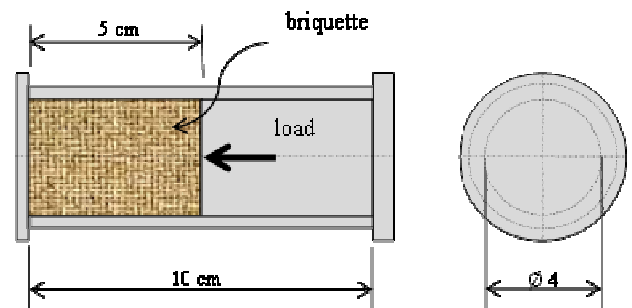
Schematic dimensional molds and briquettes are burning process.
